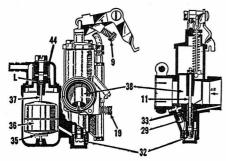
Cross sectional view of typical Del' Orto MA and MB type carburetor. Idle mixture adjustment is accomplished by turning screw (19). Refer to Fig. LM1-2 for legend.
